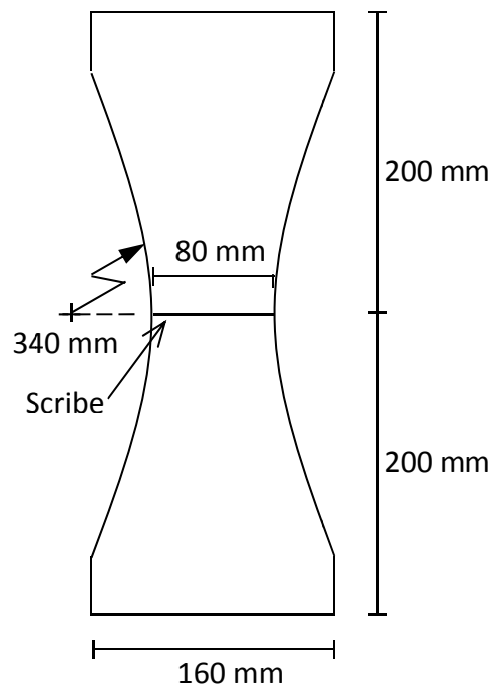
Dogbone shaped specimen used for tension-tension fatigue tests
